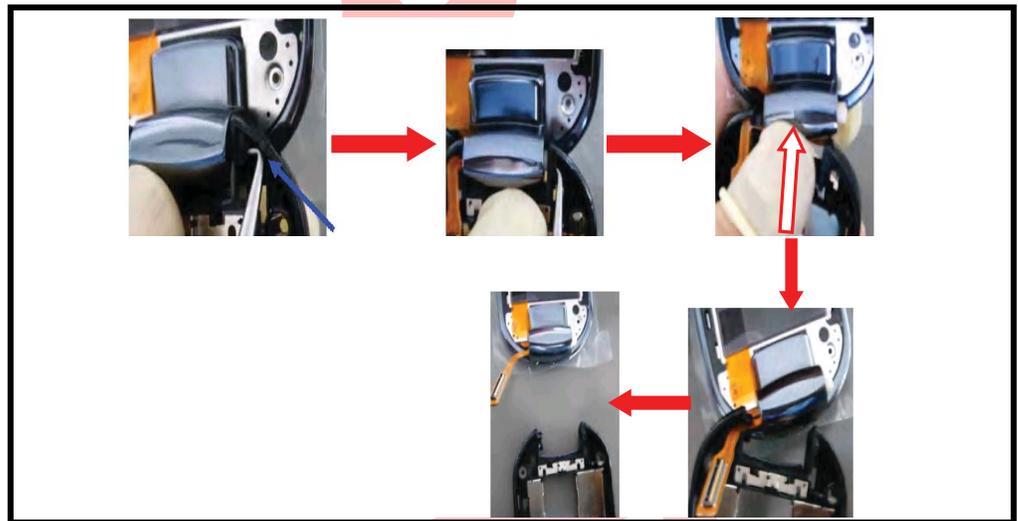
Separating the Flip Assembly from the Xcvr Assembly
